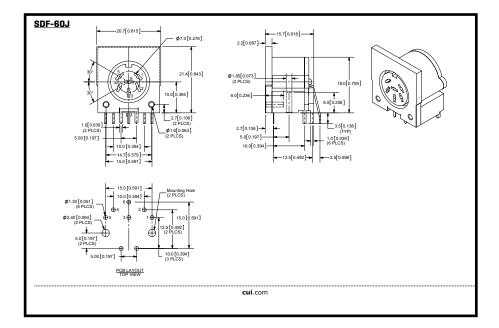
6 pin DIN connector diagram (Courtesy of CUI.com)
